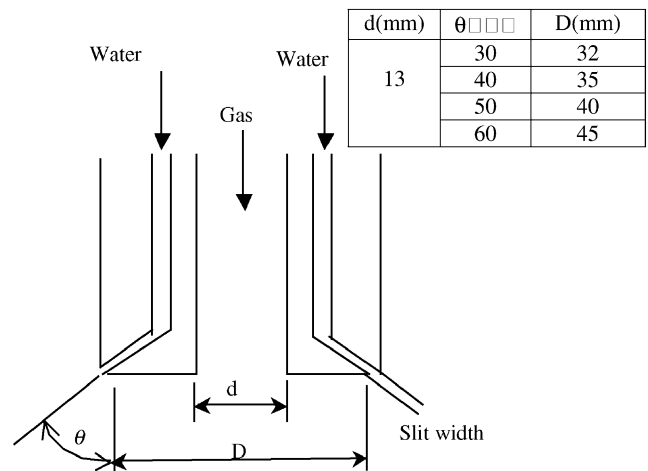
Structure and size of water curtain nozzle used in underwater laser welding.
